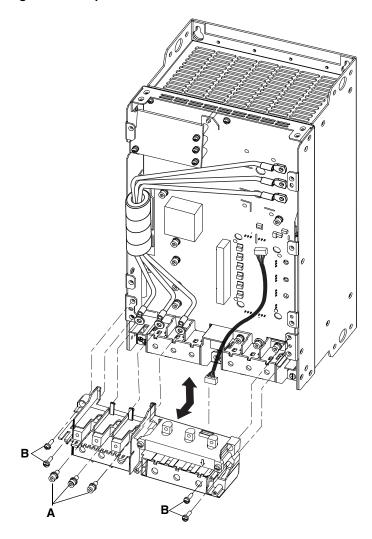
Top Terminal Block Removal: 400/460 V Controllers
